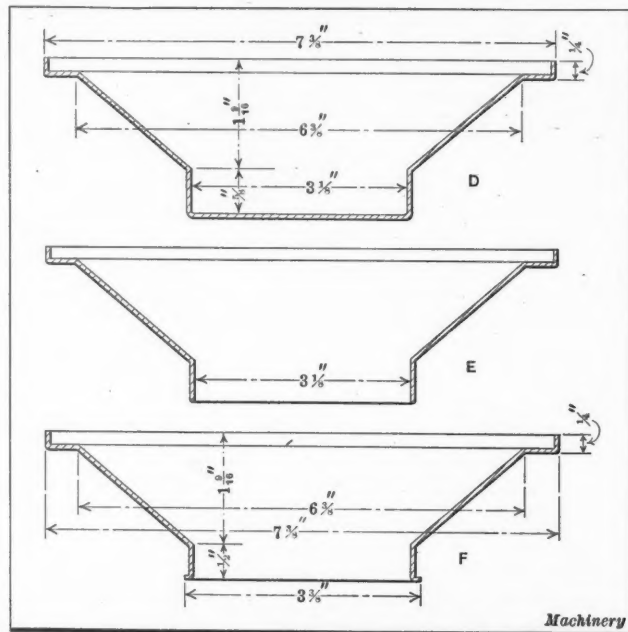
Shell after Forming, Blanking and Edging Operations have been performed
